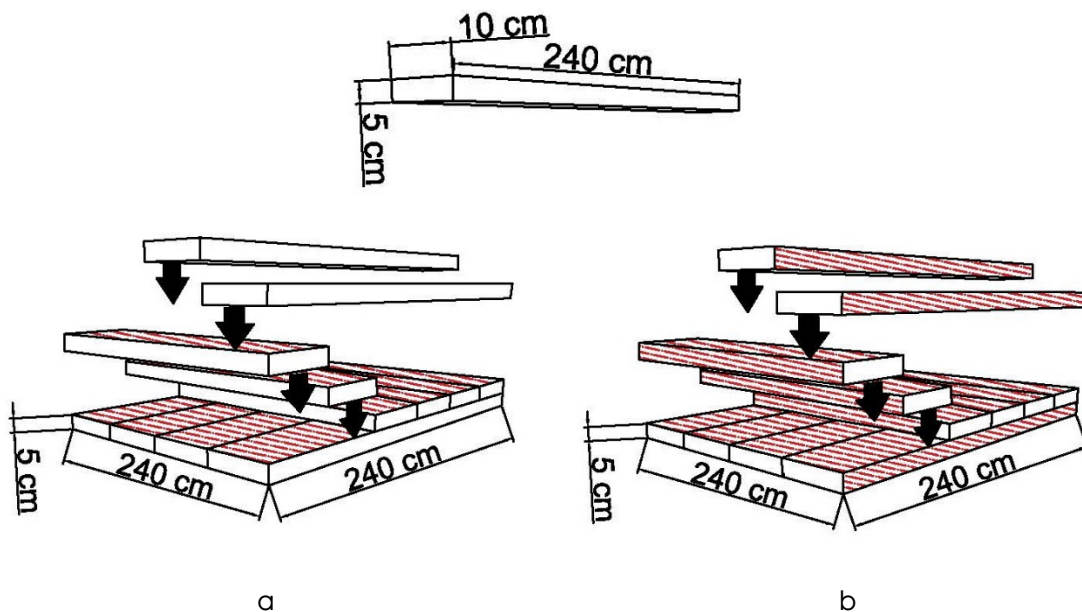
a) Non-edge gluing, b) Edge gluing (The shaded area shows the surfaces where gluing is applied)
